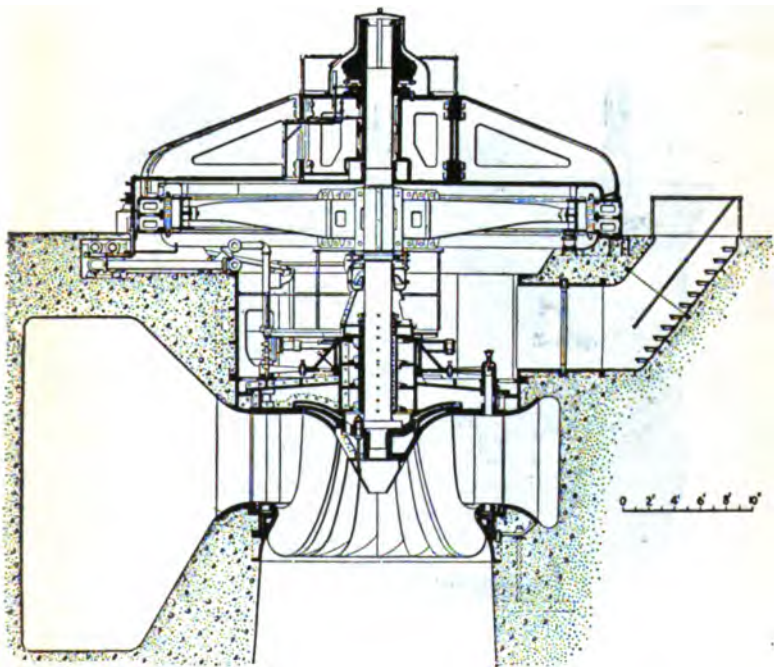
SEC. 10yy.—Sectional elevation of one of the ten main units of the Cedar Rapids Manufacturing and Power Co.
